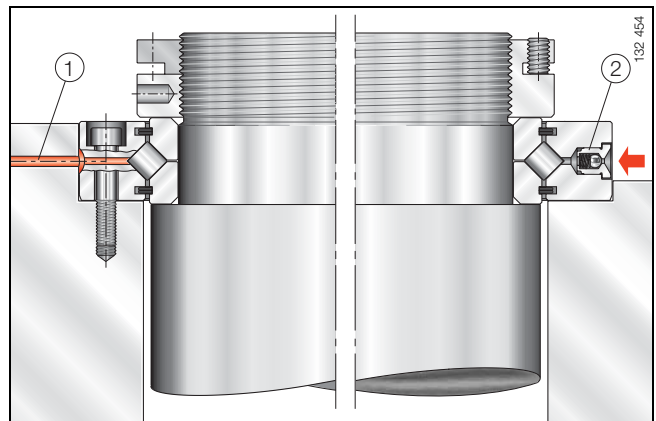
· Radial and axial location of bearing rings – lubricant duct in the adjacent construction
